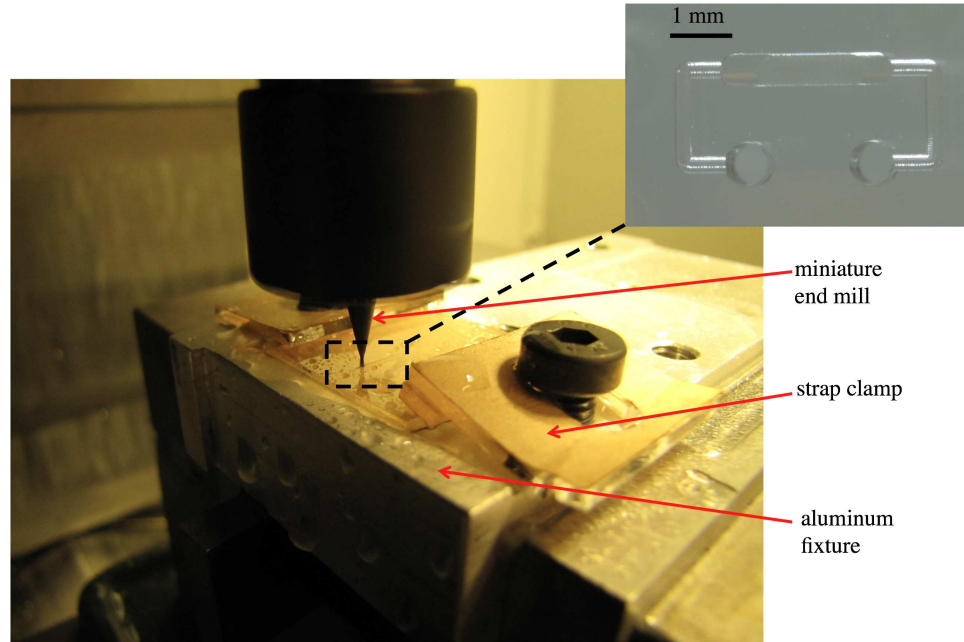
Photograph of direct milling of PMMA substrate in chip manufacturing process. The aluminum fixture is used to zero the chip in the x-y plane, and the end mill in the z direction. The inset shows a typical milled geometry.
